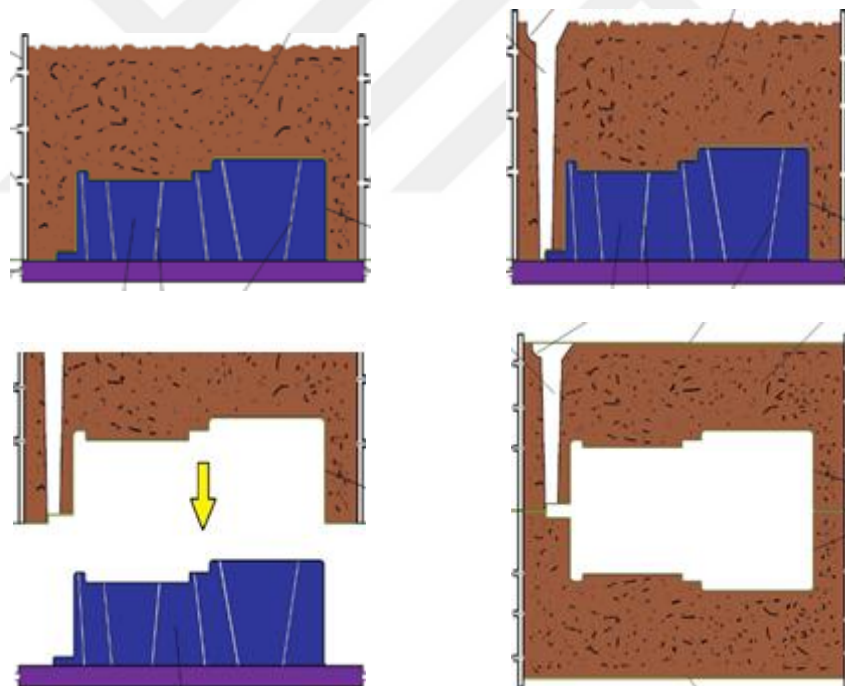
Mold preparation of vacuum casting a)drag b)cope c)pattern removal d)mold assembly[29]
